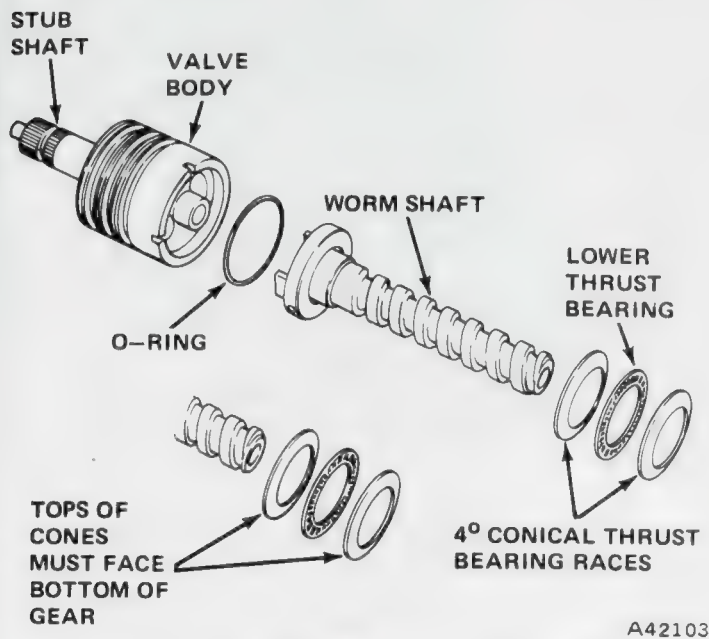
K-14 Valve Body-Stub Shaft-Wormshaft Assembly
